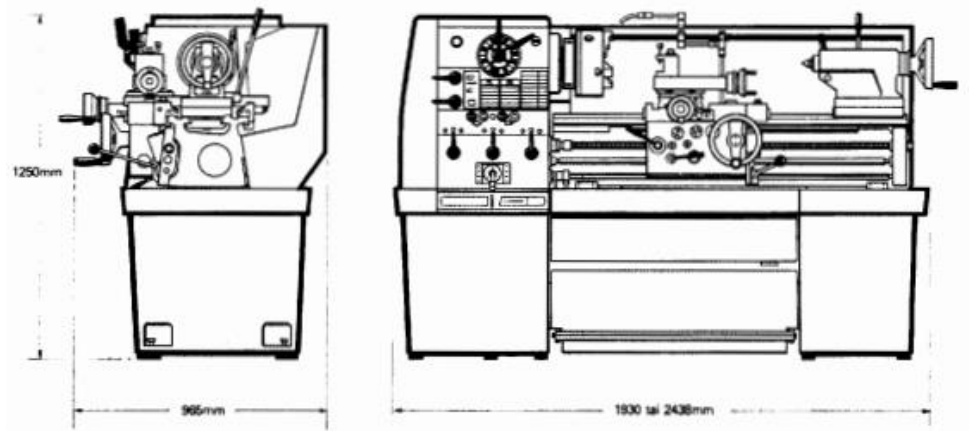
Colchester Triumph 2000 Lathe Machine Dimensions
